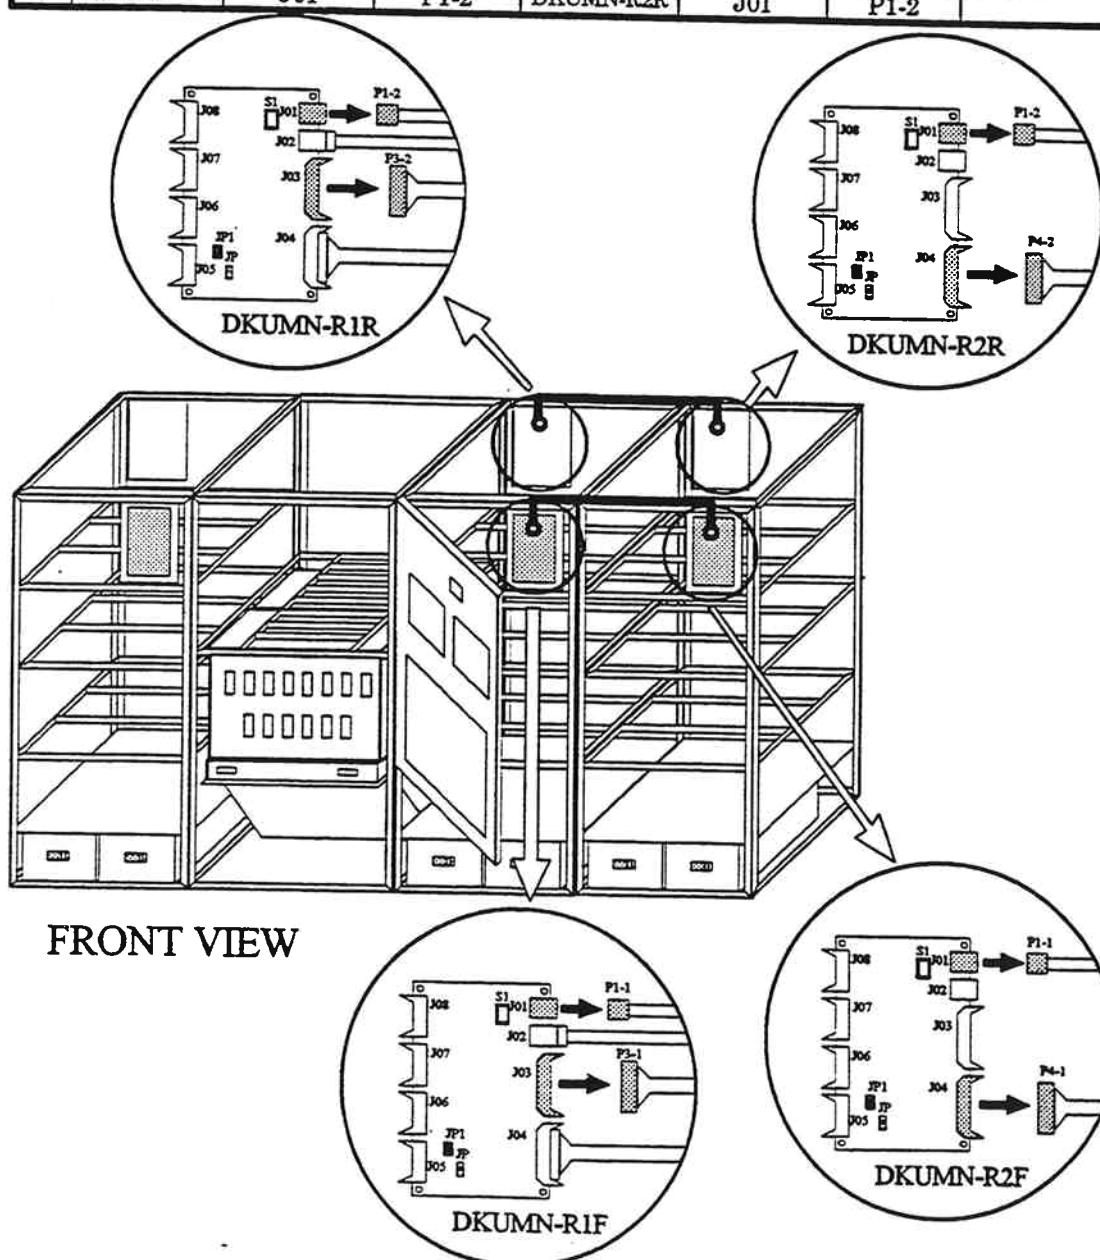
Connection of DKUMN Cables
